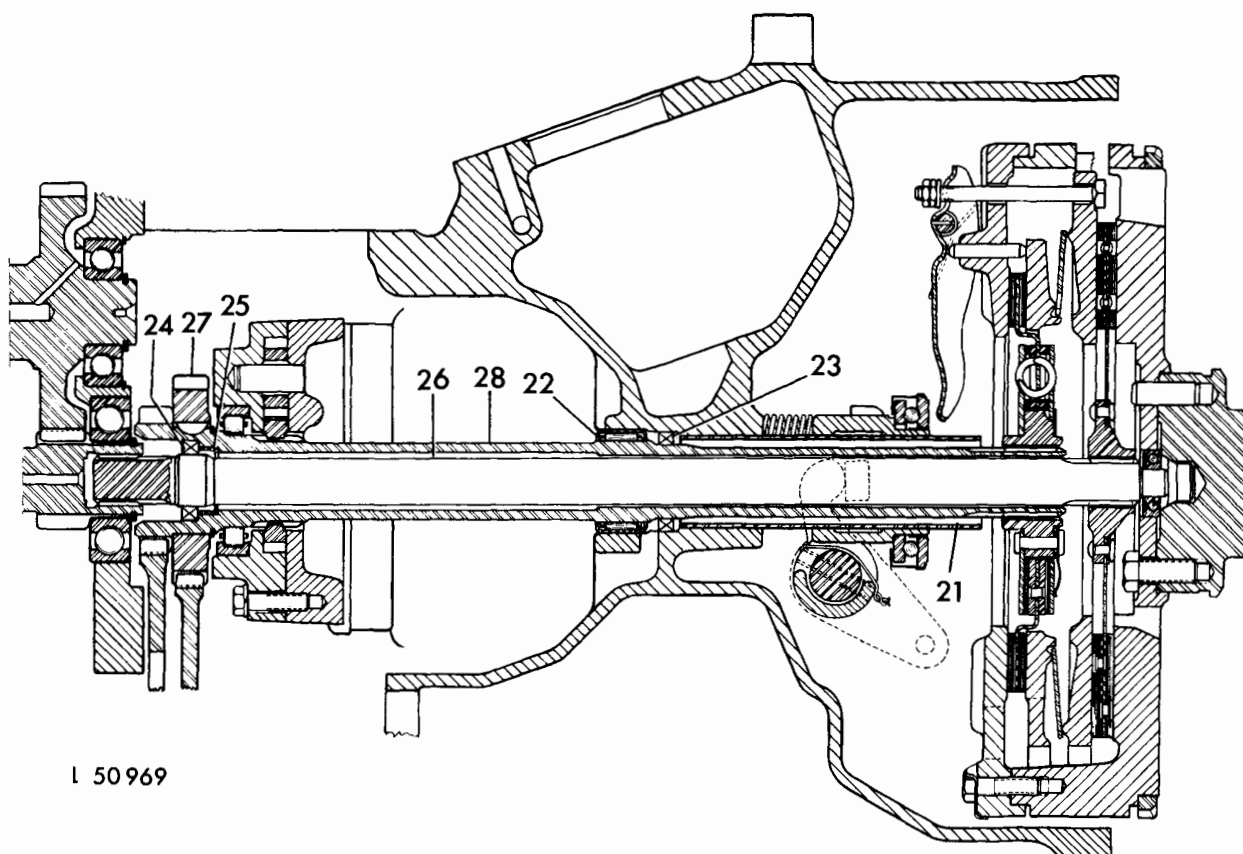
Drive Shaft and Hollow PTO Drive Shaft Installed
